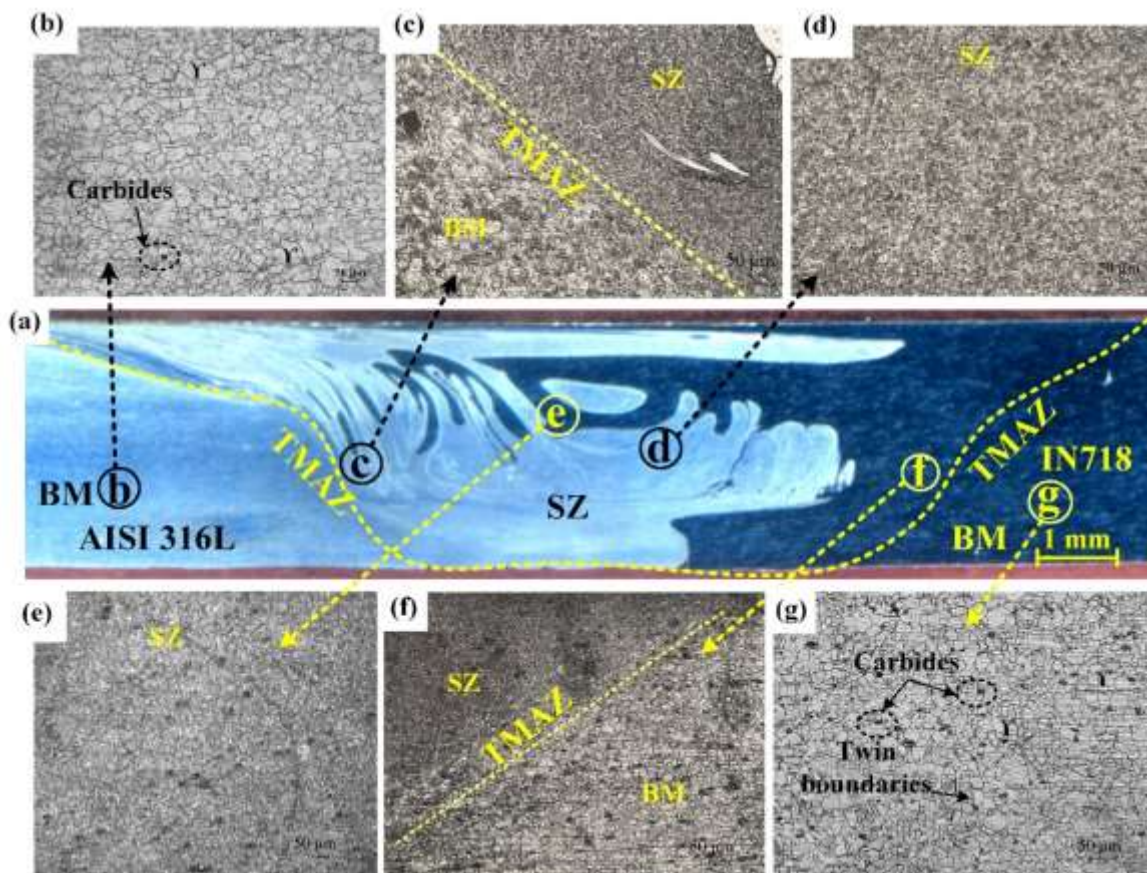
Cross-sectional view of dissimilar I-FSWed joints under 140 mm/min.
